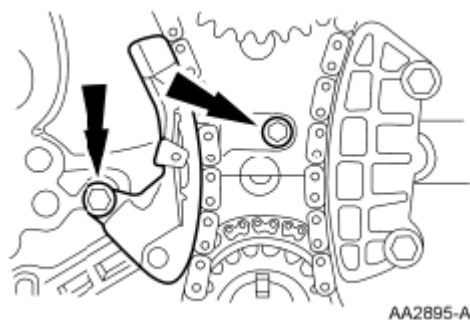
Locating Jackshaft Chain Tensioner Bolts
